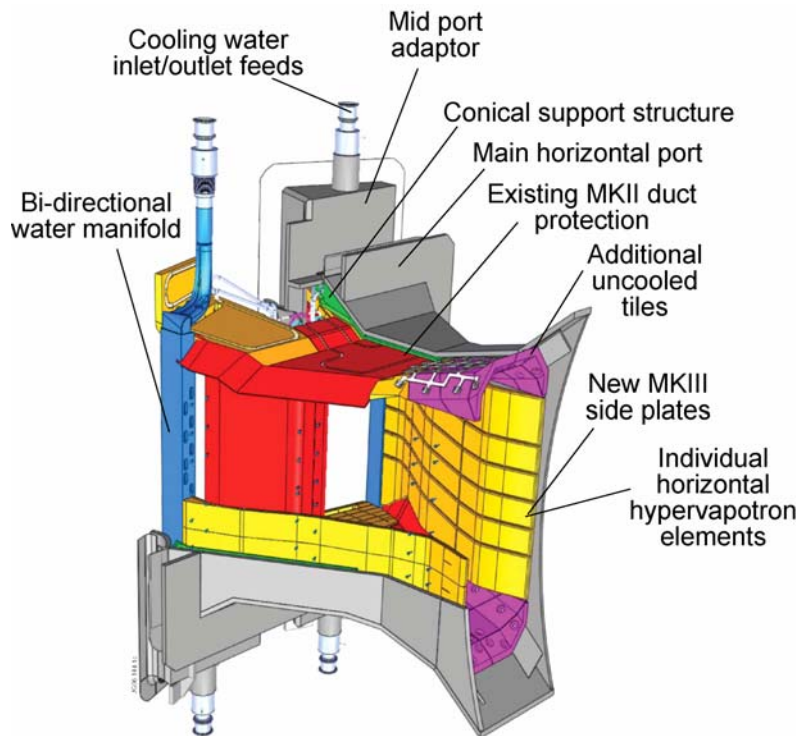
Schematic of actively cooled neutral beam duct scraper assembly. A photograph of the side panel (coloured yellow) is shown in Figure 3.8
